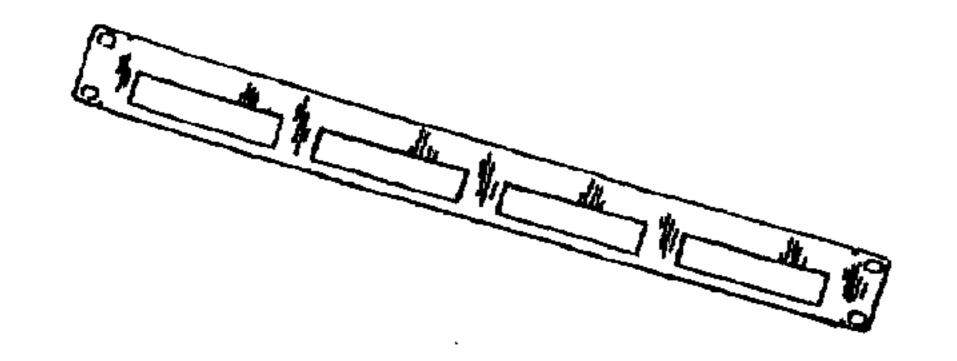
is a bottom view of the patch panel in the second embodiment; and,
